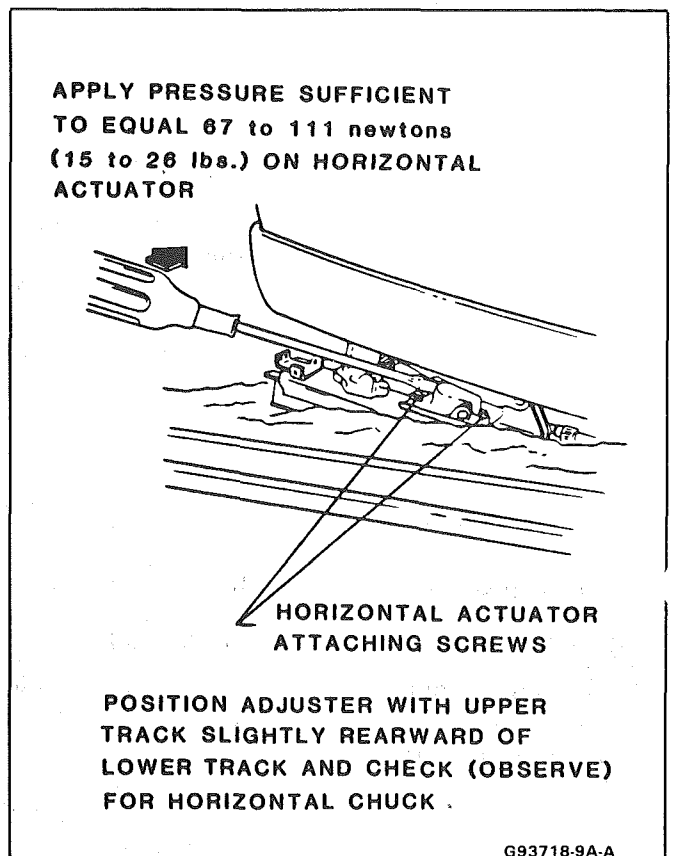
Horizontal Actuator Adjustment - Power Six-Way Seat
